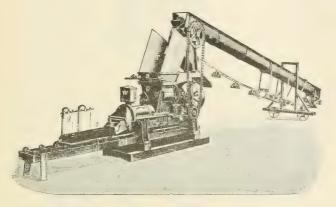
Schlickeysen's peat machine with gripping and tearing contrivance and elevator (in back position).
